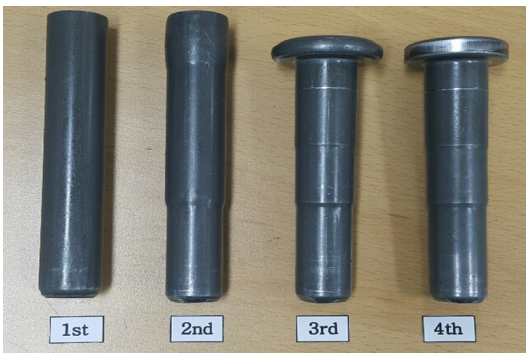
4-Step sequence for the cold forging of a wheel bolt
